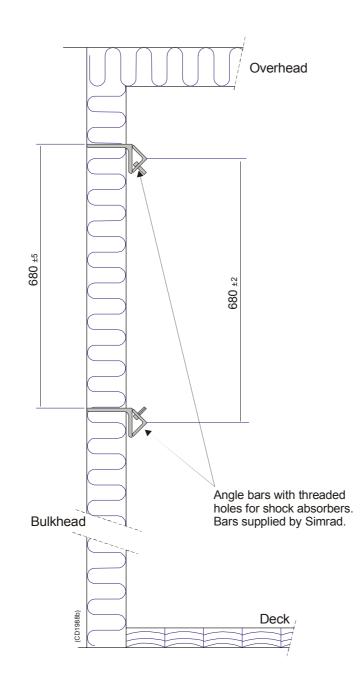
Mounting the brackets for the Transceiver Unit - side view
